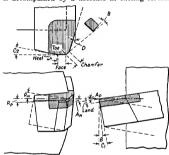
NOMENCLATURE OF MILLING CUTTER
